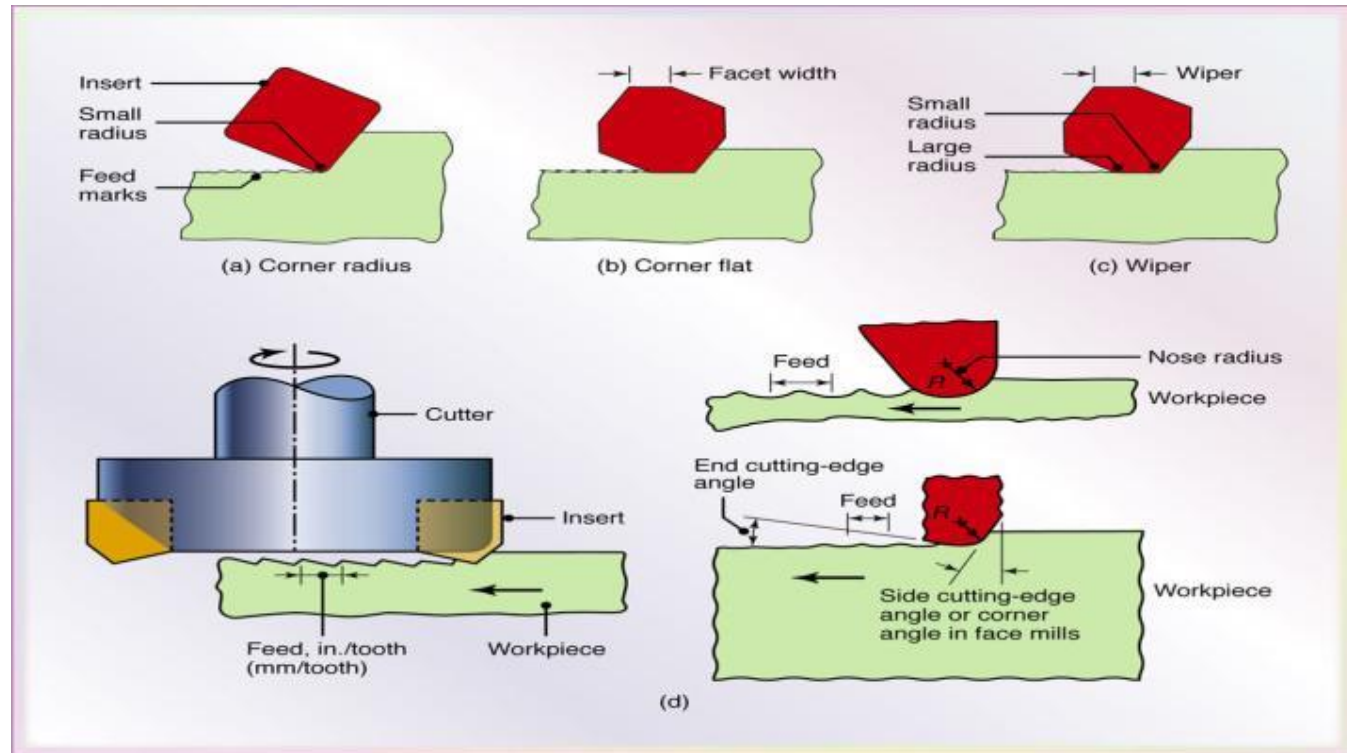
Schematic illustration of the effect of insert shape on feed marks on a face-milled surface: (a) small corner radius, (b) corner flat on insert, and (c) wiper, consisting of small radius followed by a large radius which leaves smoother feed marks. (d) Feed marks due to various insert shapes.
